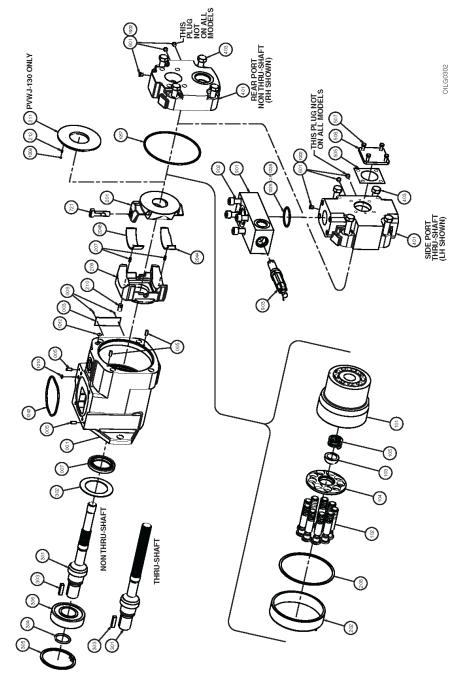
Exploded parts drawing, PVWJ-064/-076/-098/-130 C-Frame (520024-301 sheet 2 of 4).
